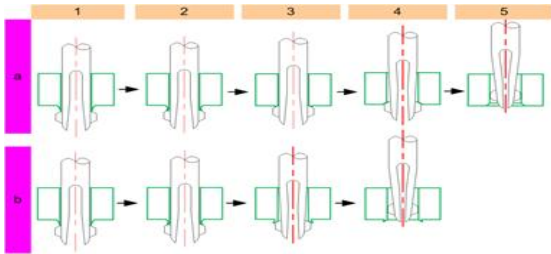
Cutting mechanism of deburring by the new developed tool (a) when burr is removed completely (b) when burr remains
